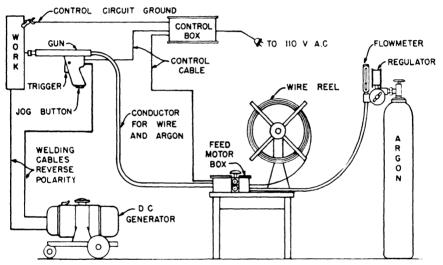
An automatic inert gas are welding machine (Courtesy of: Air Reduction Sales Company)
